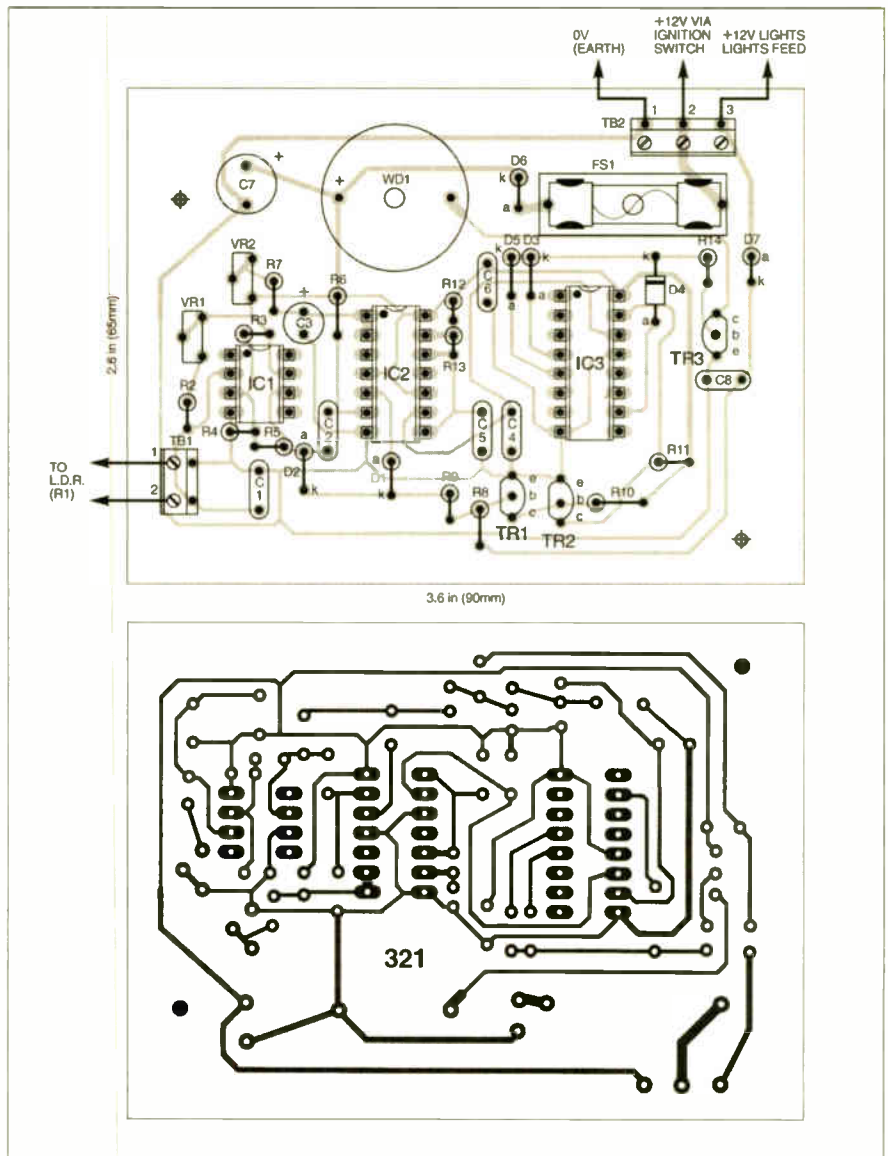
Printed circuit board component layout, wiring and full-size underside copper foil master pattern for the Lights Needed Alert.
